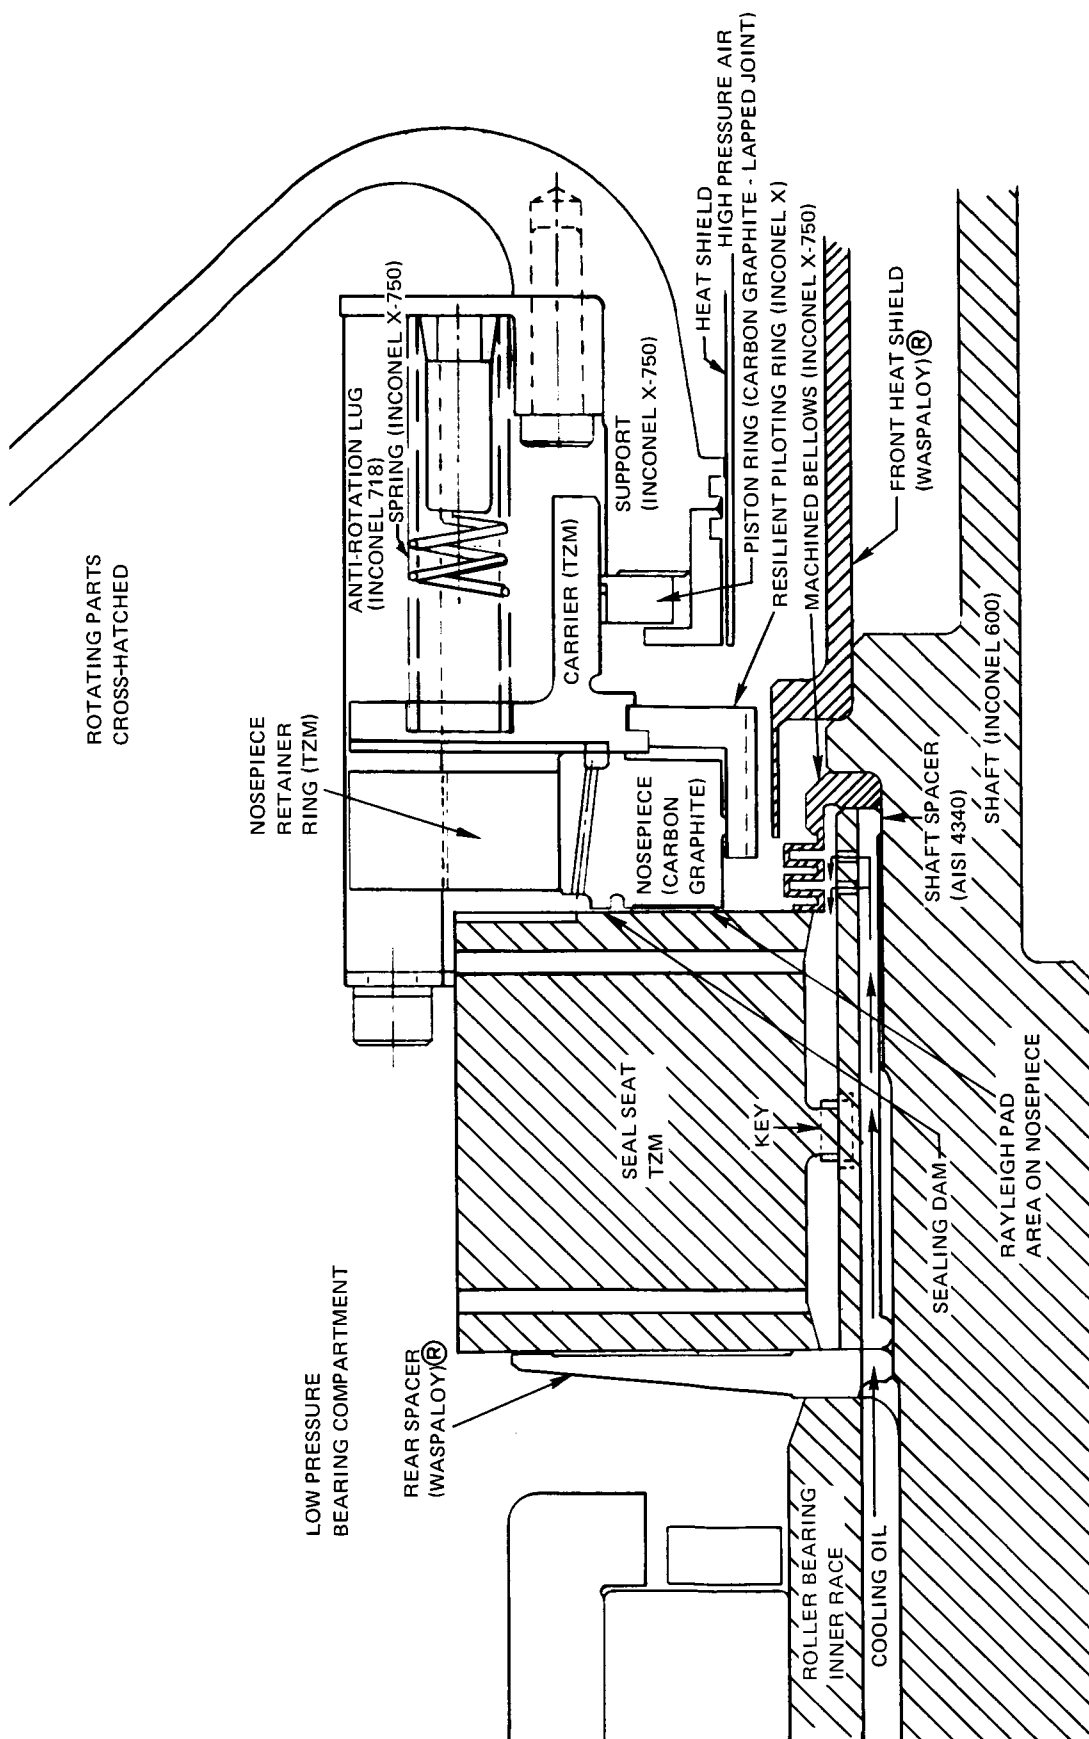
Hub and Seal Assembly Configuration as Used During Axial Seal Seat Runout Testing and During First Part of Contaminated Air Testing
